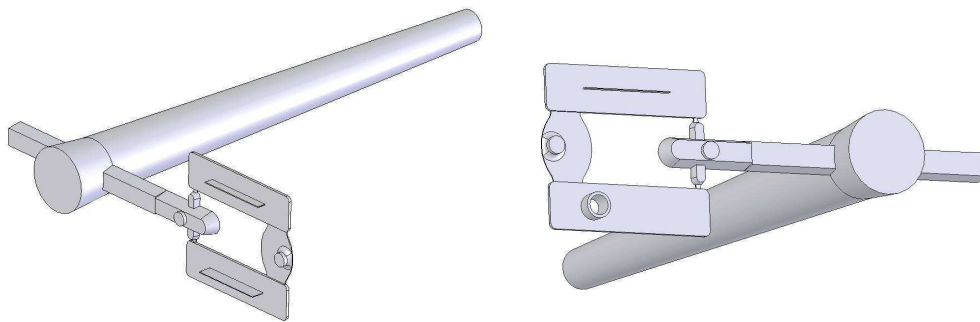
3D models of the parts to be obtained on the moulding blocks produced by subtractive technologies
